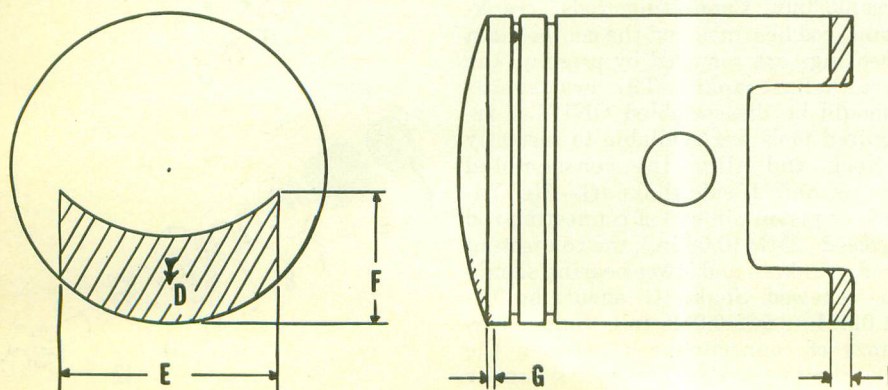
Areas of piston to be modified. Refer to text for appropriate dimensions.
